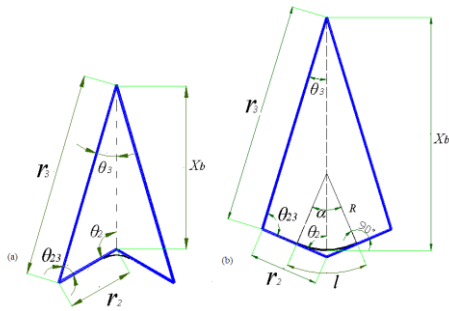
Geometrical parameters of the tool and sheet metal specimen (a) bending direction and (b) reverse bending direction
